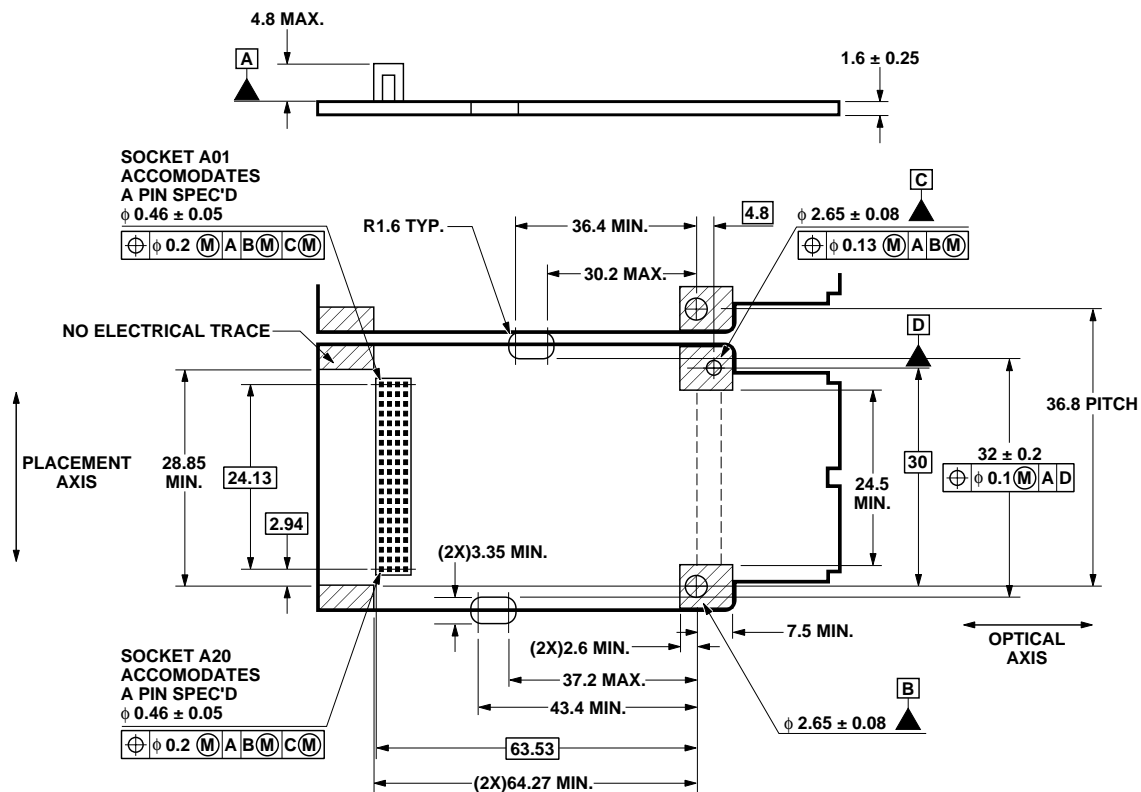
Host PCB Layout for Mounting the HGLM-1063.
